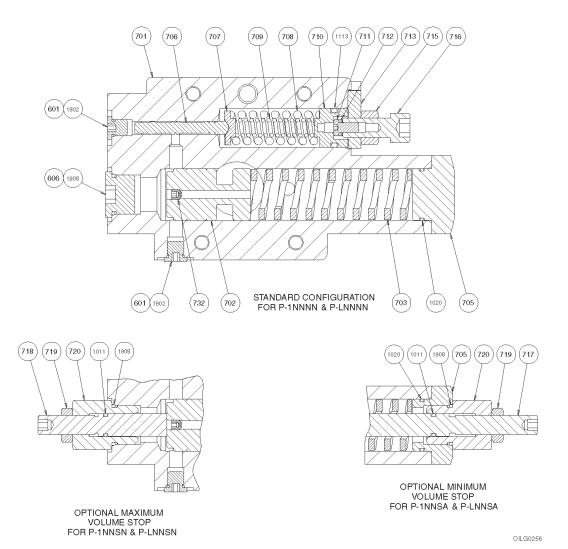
Parts Drawing for "P-1NN" and "P-LNN" Control (519975-101 sheet 1)
